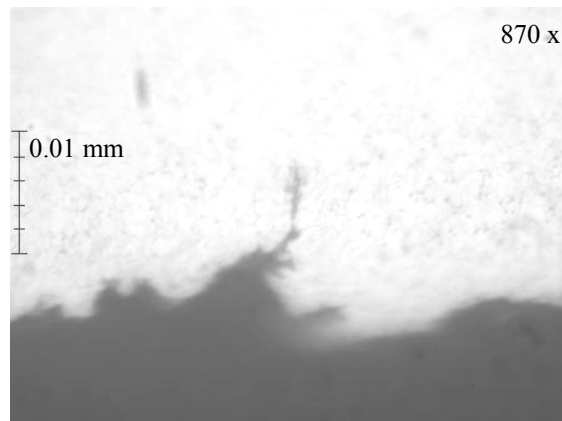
Initial flaw in the centre of inner surface of corner.
